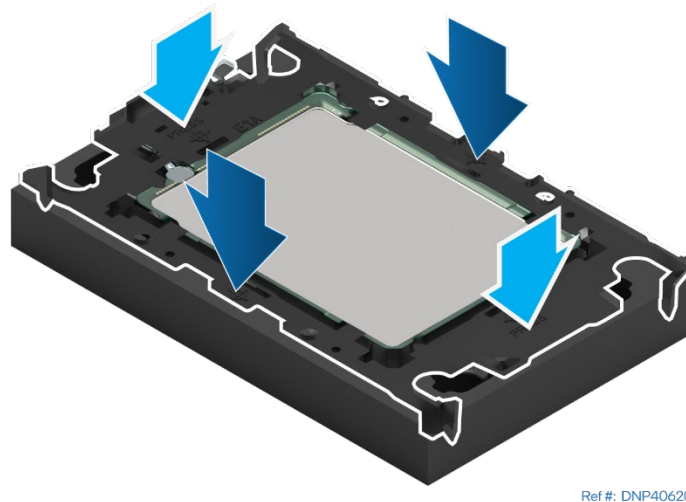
Installing Processor Carrier Clip onto Processor – Part 2
